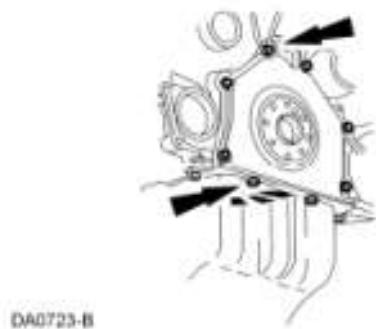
Locating Bolts And Crankshaft Rear Seal Retainer Plate
